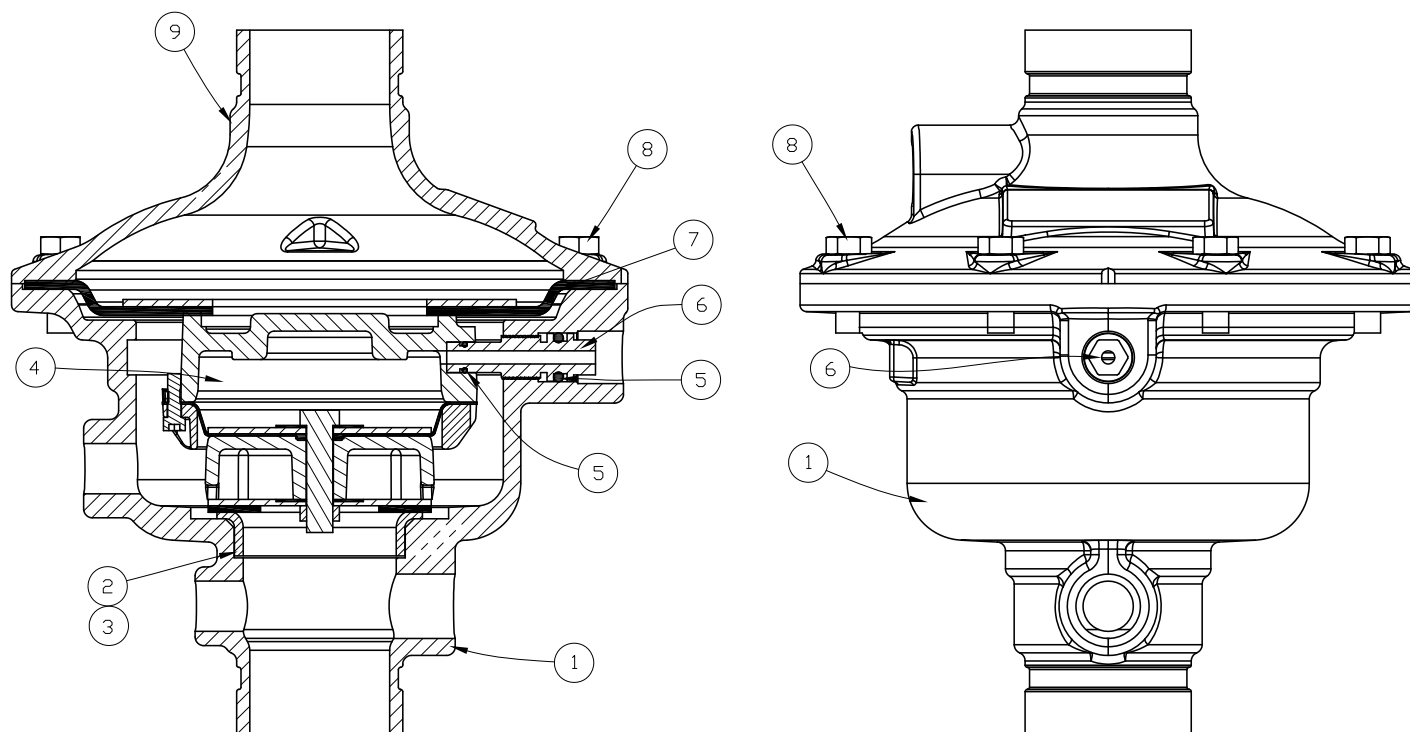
Model G-2000P Valve Components List/Replacement Parts
